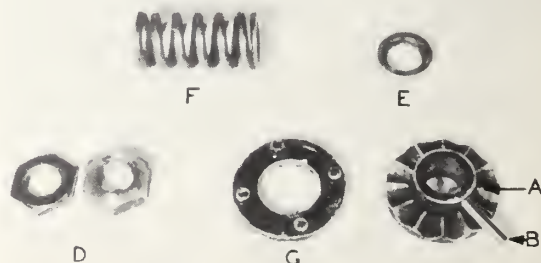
Snap-clutch parts. A, Snap-clutch plate with hub welded in. B, Snap-clutch pin. C, Snap-clutch plate with anchor lugs. D, Lock nuts. E, Grease retainer, National no. 50049. F, Clutch spring.
